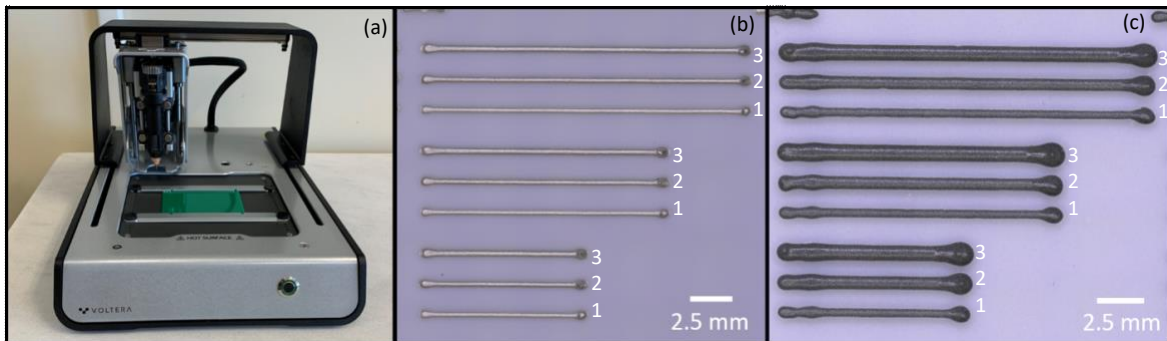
Printed Melt Wires: (a) Voltera V-One PCB printer used for printing both (b) Silver, and (c) Solder ($\text{Sn}_{42}\text{Bi}_{57.6}\text{Ag}_{0.4}$)
